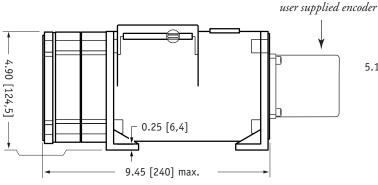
Outline Drawing (36 oz. cable tension only)
